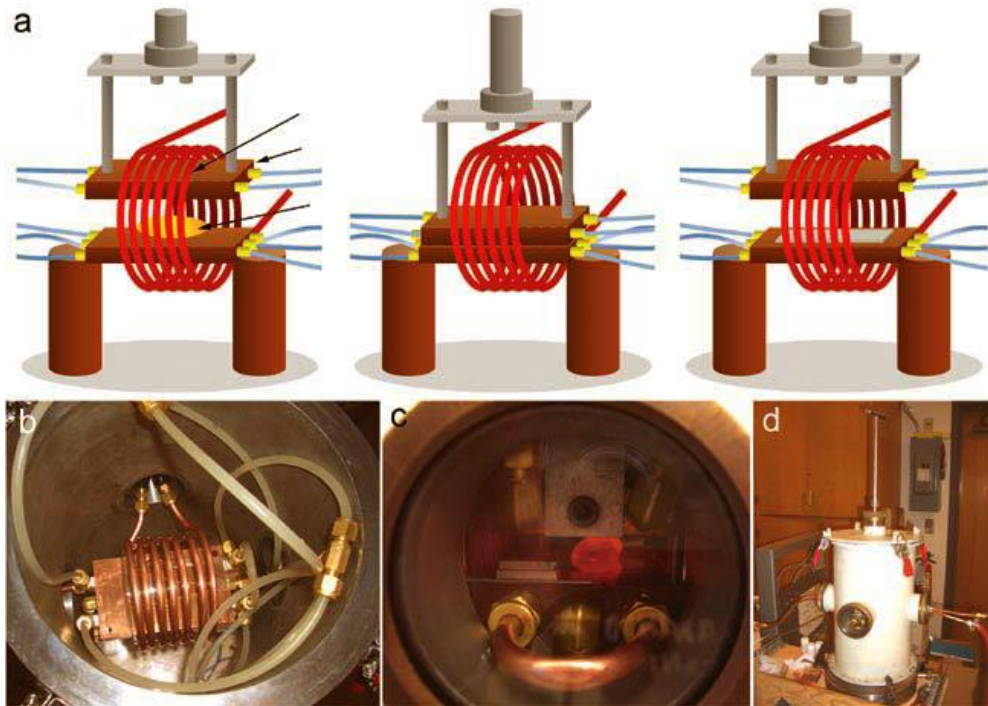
Forge casting assembly. (a) Schematic diagram of the process step 1 metal charge being inductively heated. Two water-cooled copper plates brought together to forge cast sample. Plates open with formed sample attached to bottom plate. (b) Top view of assembly. (c) Side view of assembly showing water cooled plates. (d) Outside of vacuum chamber press mechanism can be seen at top of chamber [11].
